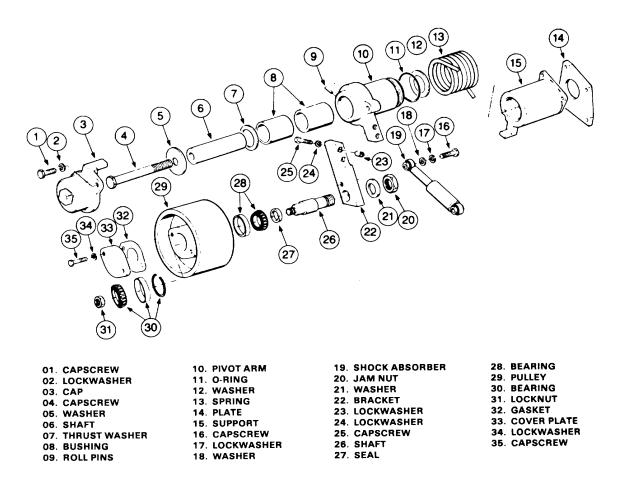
J-15. Exploded View of the Fan Hub Idler Assembly
